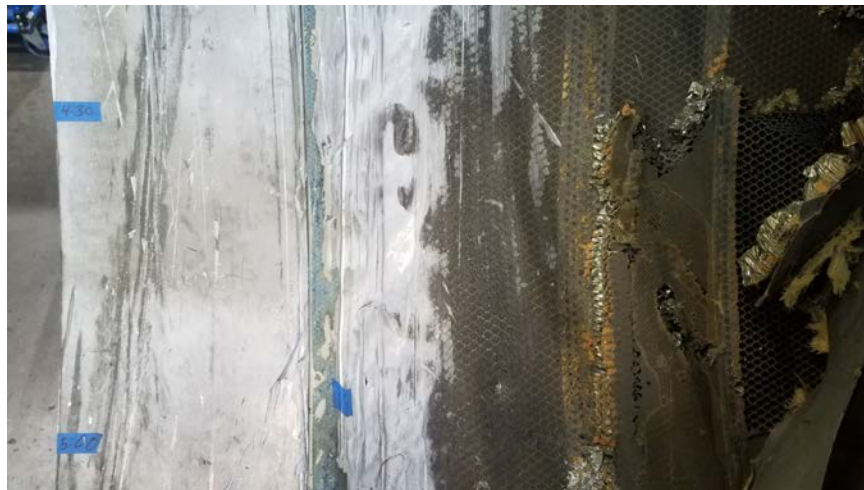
View of fan blade rub strip showing only the honeycomb glue remaining. (P&W)
